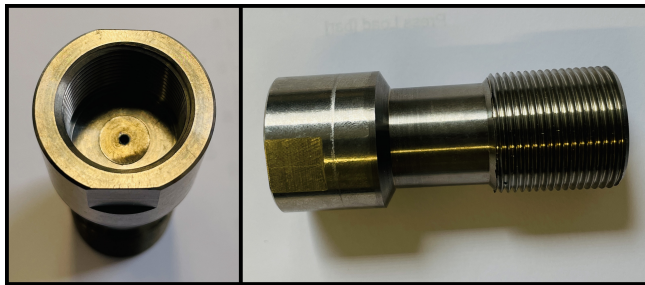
The F1-TiZr prototype clamp cell before final manufacturing with the NiCrAl inner cylinder pressed into the TiZr outer cylinder. The interference value is 0.10 mm. *Left*: view from the bottom of the cell; *right*: side view.
